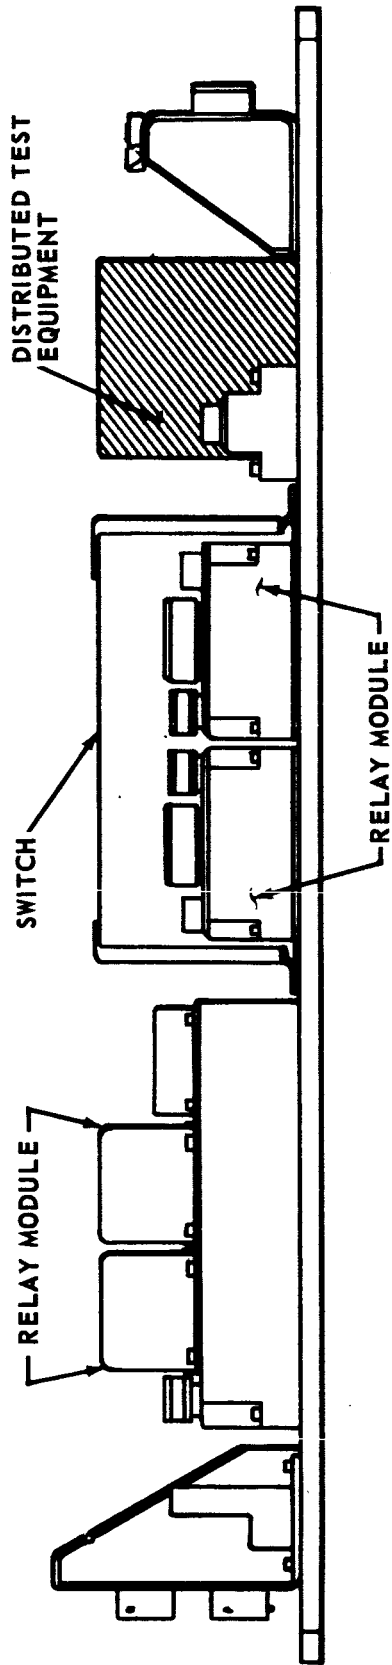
VEHICLE INCORPORATION -- CHASSIS
